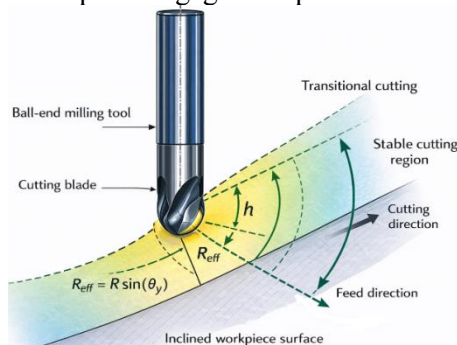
Tool-workpiece engagement geometry in ball-end milling of an inclined surface
